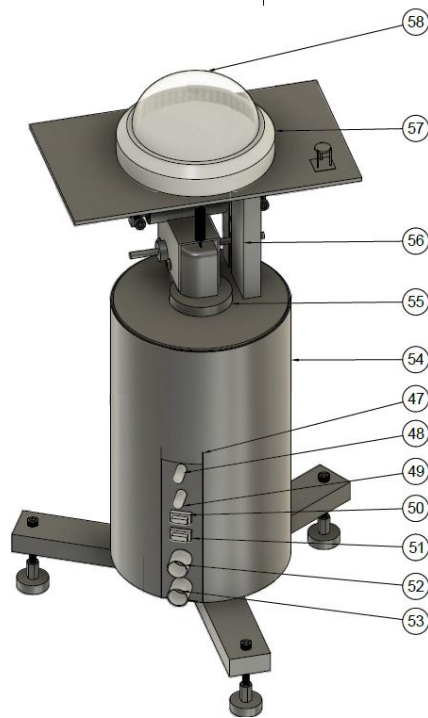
The 3D model of the mobile rotating mechanism, with electronics and casing
